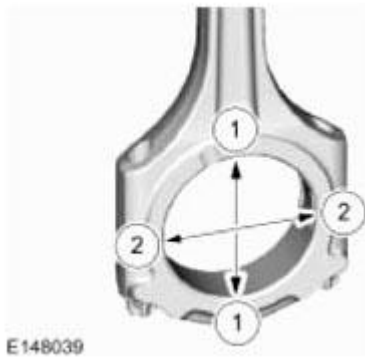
Identifying Connecting Rod Large End Bore Measuring Directions
